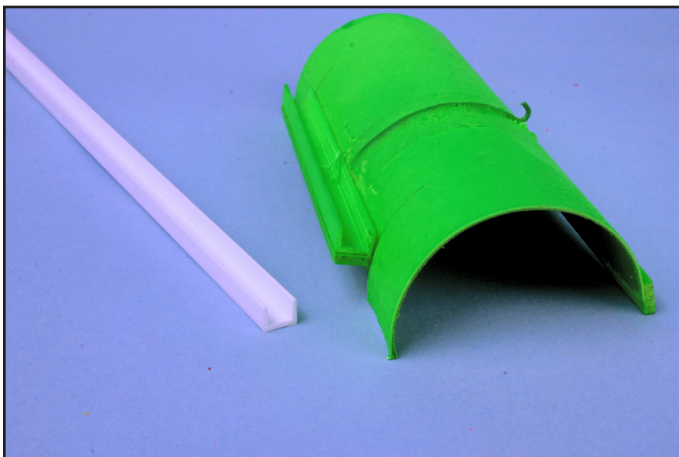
A "U" shaped extrusion was the final modification to the cradles. This really cut down on the assembly time to make a set for a rocket.
